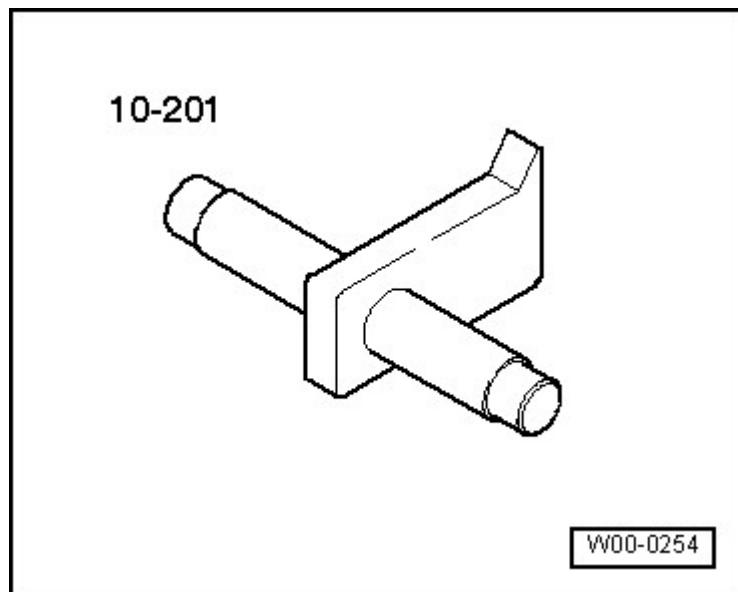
Identifying Counter-Holder Tool 10 - 201
